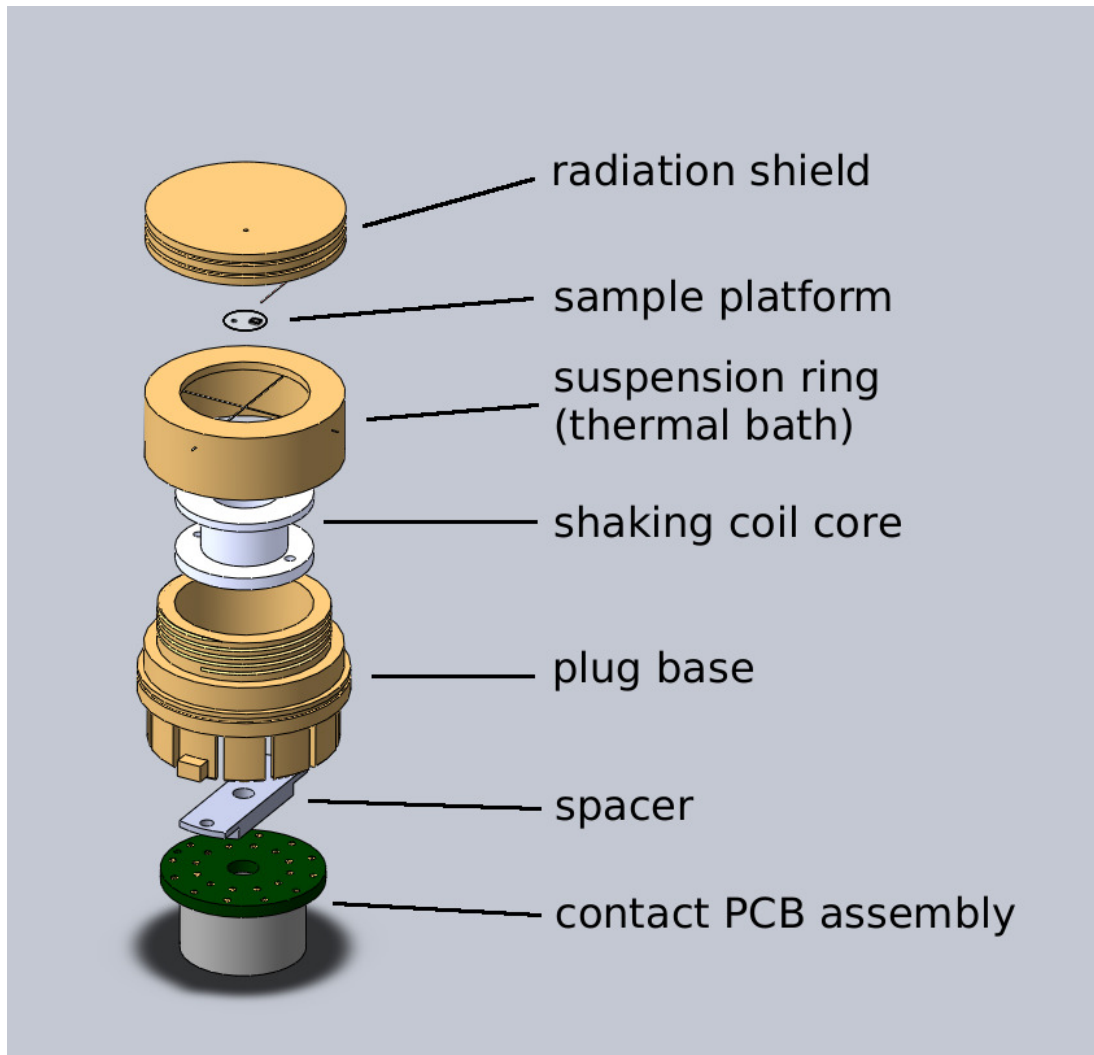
Explosion drawing of the puck for parallel shaking
